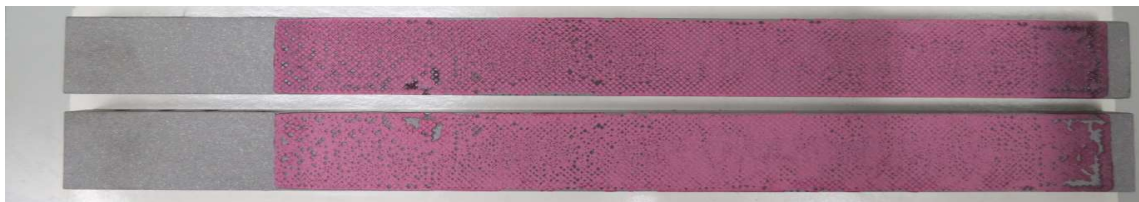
Fracture surface of a specimen after the DCB test
